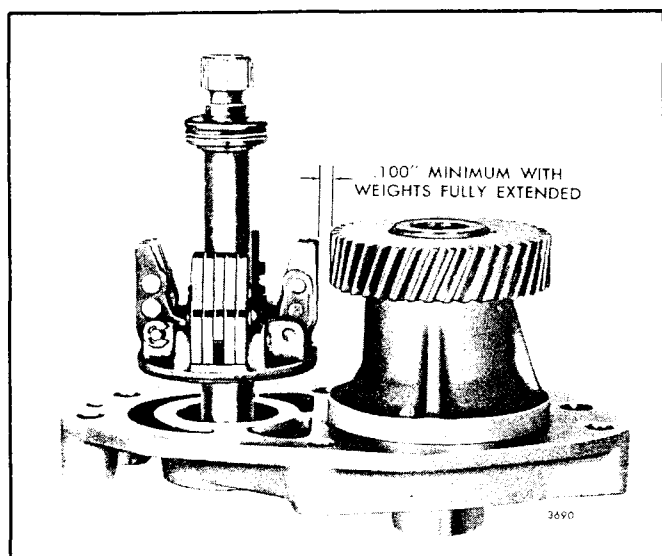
Minimum Clearance Between Blower Drive Gear and Governor Weights
